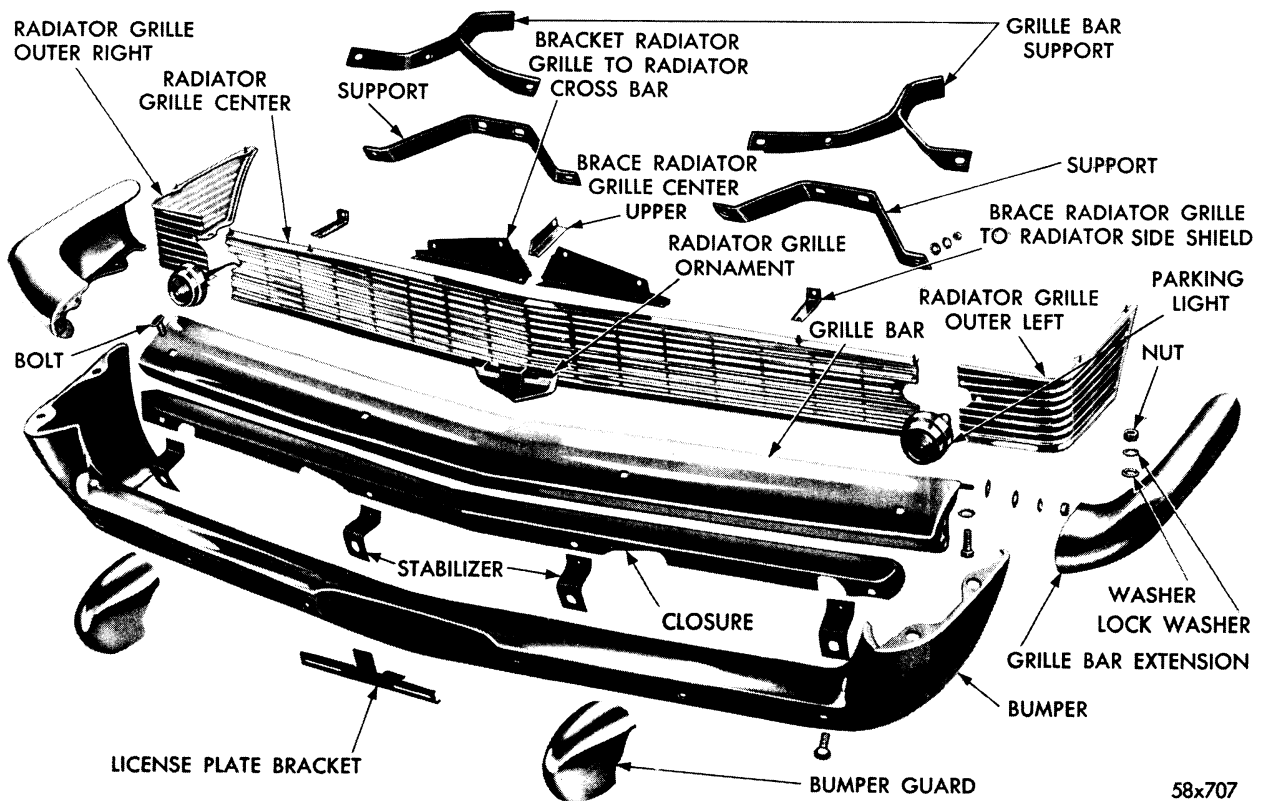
Bumper and Grille Assembly (Saratoga and New Yorker Models)
